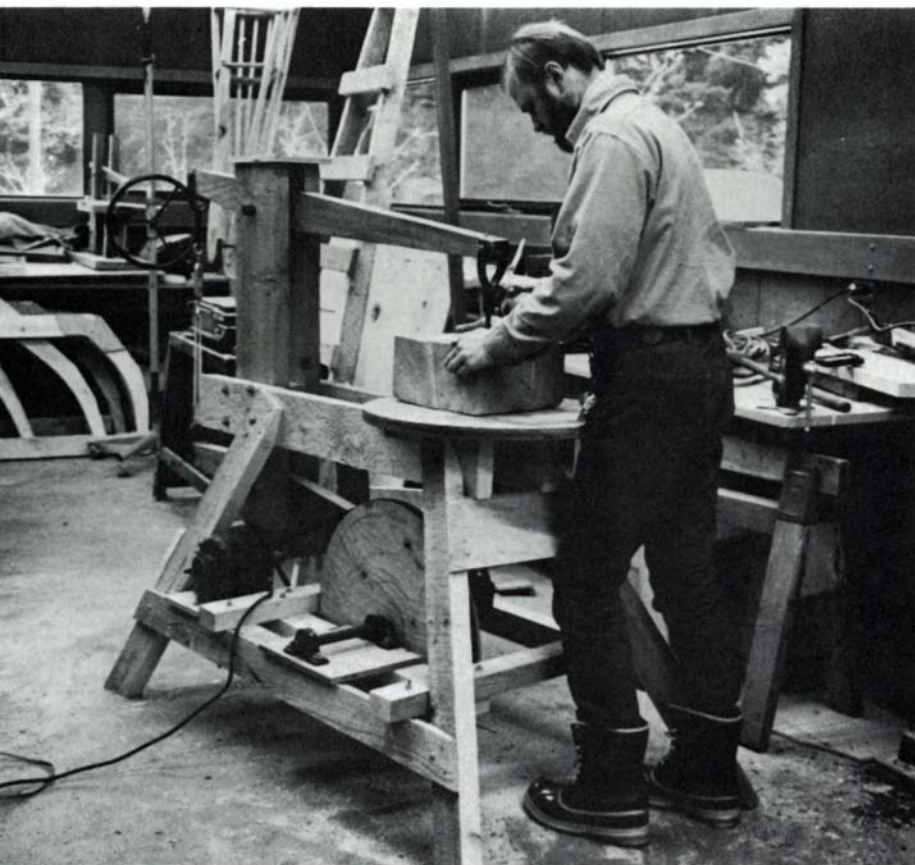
Using his walking-beam saw, White cuts through an 8-in. hardwood block. The saw is well suited for contour cutting, crosscutting and ripping both thick and thin stock, but long rippings require special attachments for the arms. Drive mechanism with $\frac{1}{4}$ -HP motor produces 144 cutting strokes per minute.
